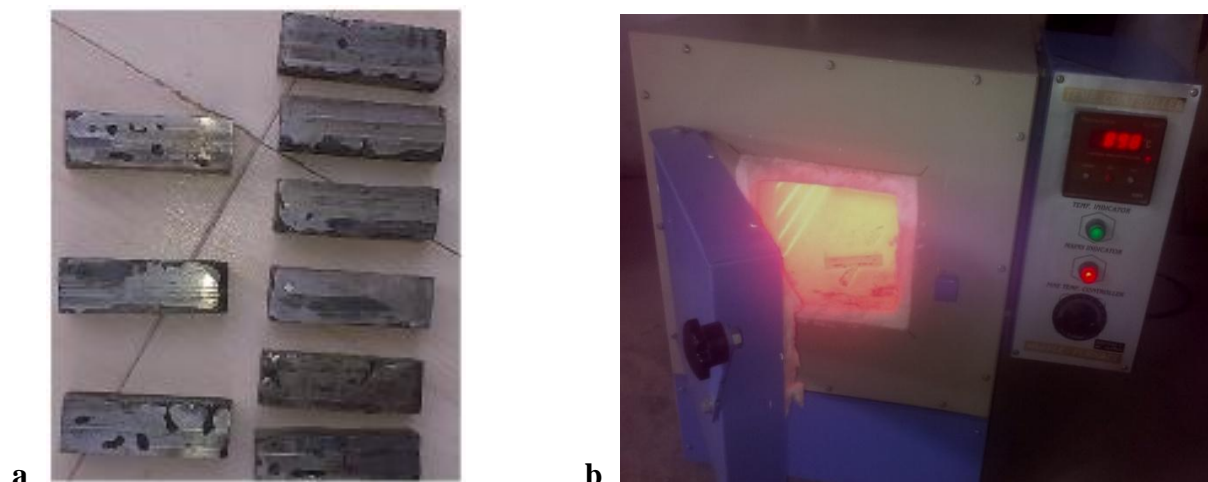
Welding Operation (a) Specimens after Surface Grinding (b) Heating of Specimen in Muffle Furnace
